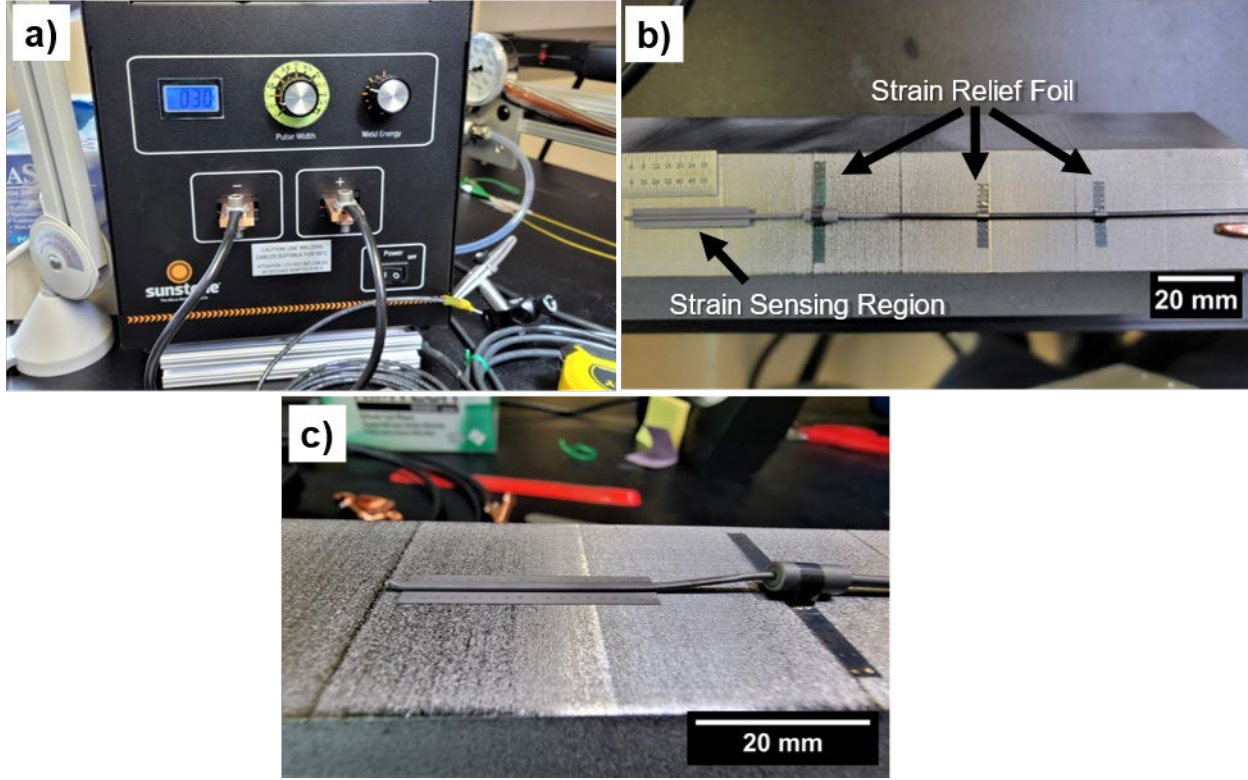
The a) Sunstone resistive spot welder used to spot weld the b) strain relief foils to the gauge and the c) sensing element of the resistive strain gauge.
